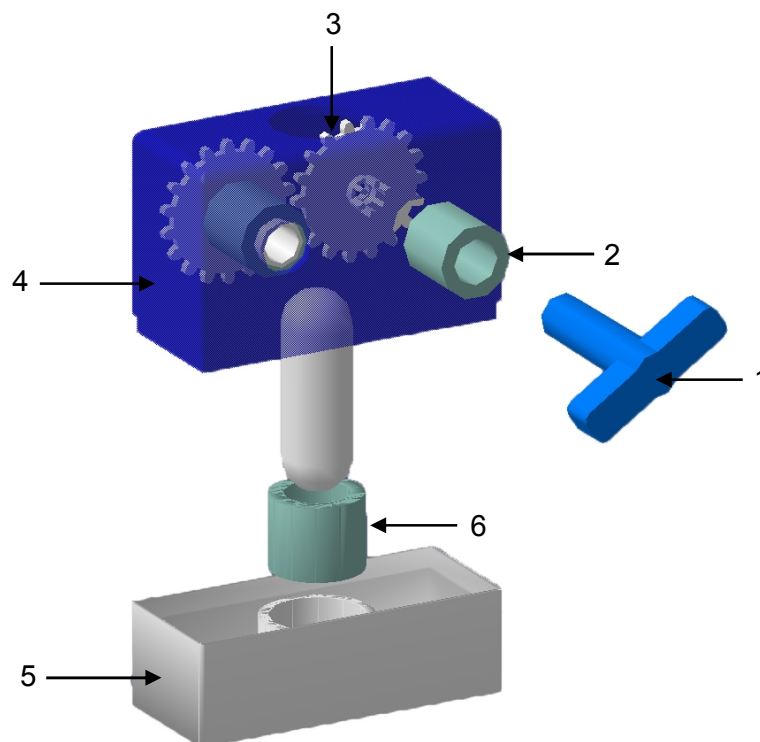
Concept 1 design; (1) handle, (2) rubber cylinder, (3) gear, (4) upper case, (5) bottom case, (6) rubber rollers
